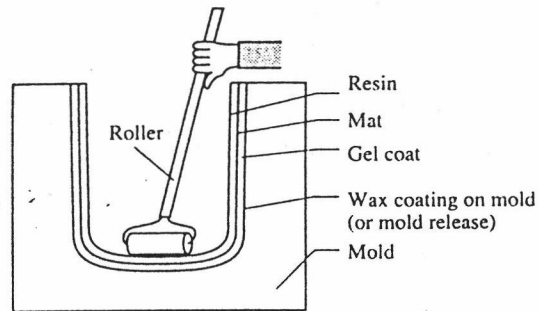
Open mold, hand lay-up composite fabrication[1].
